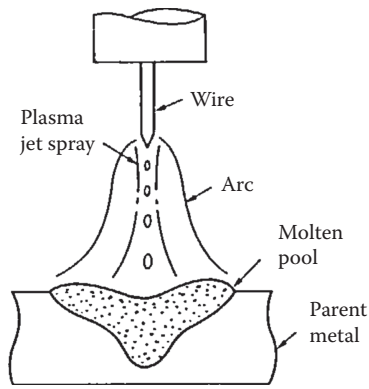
Production of arc in carbon dioxide shielded welding
